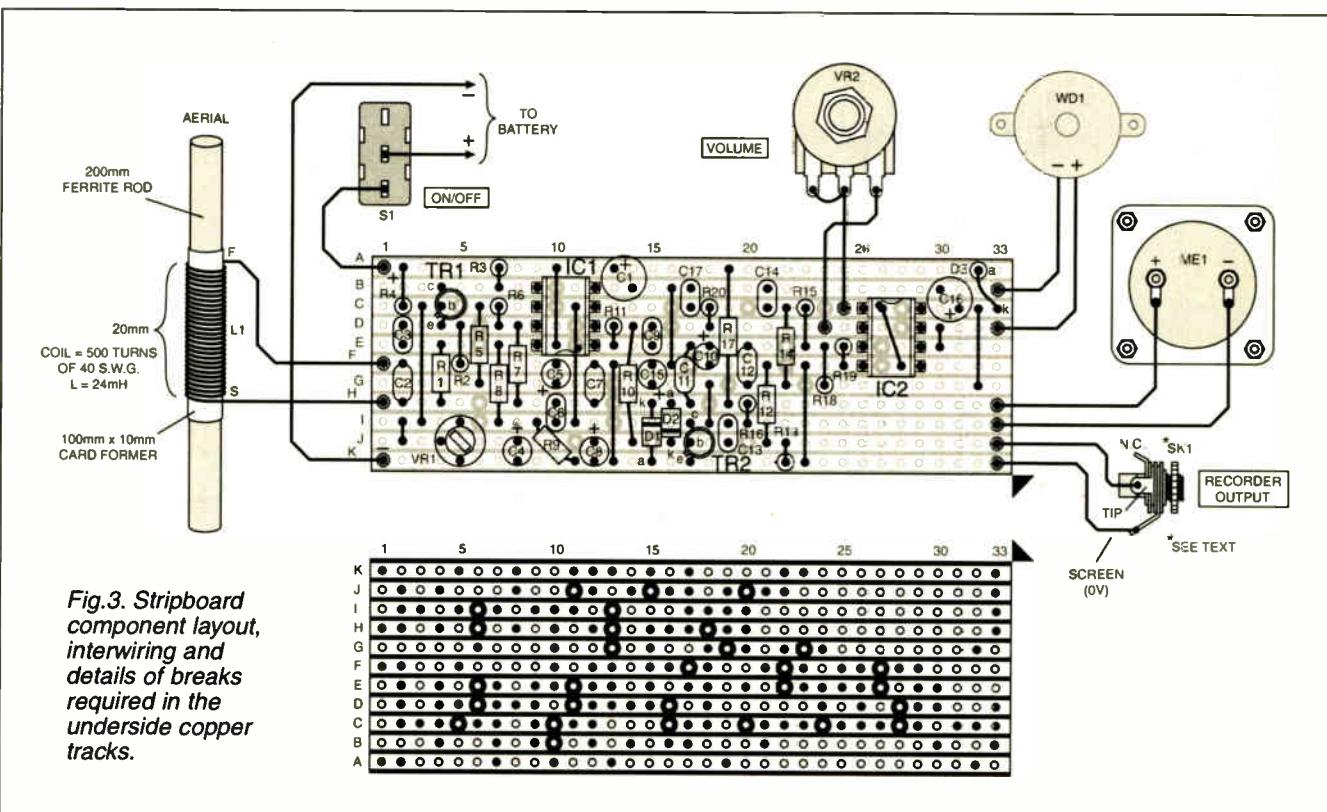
Stripboard component layout, interwiring and details of breaks required in the underside copper tracks.
